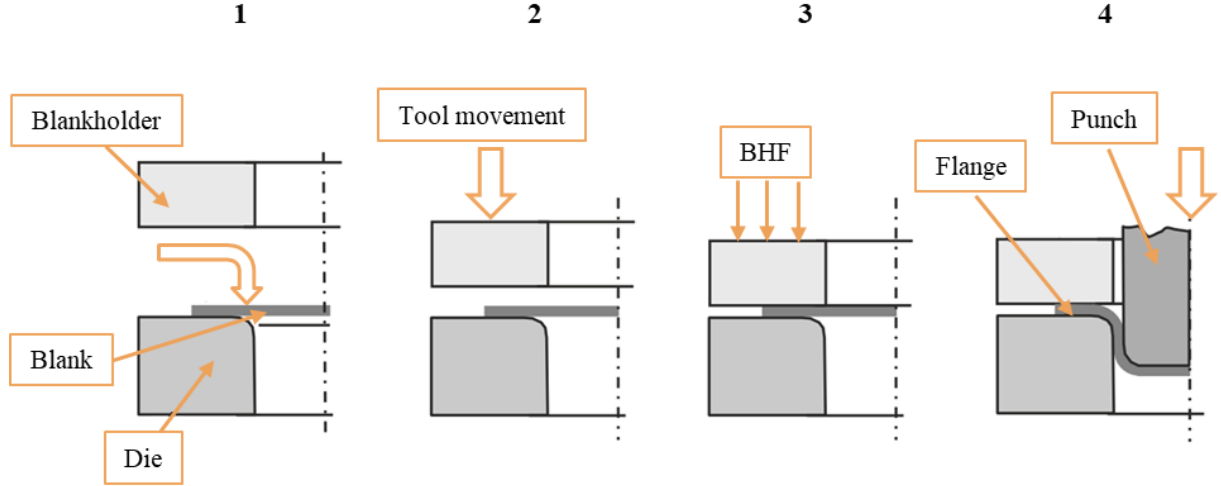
Basic steps in deep drawing procedure and the main parts of a deep drawing tool and [16]
